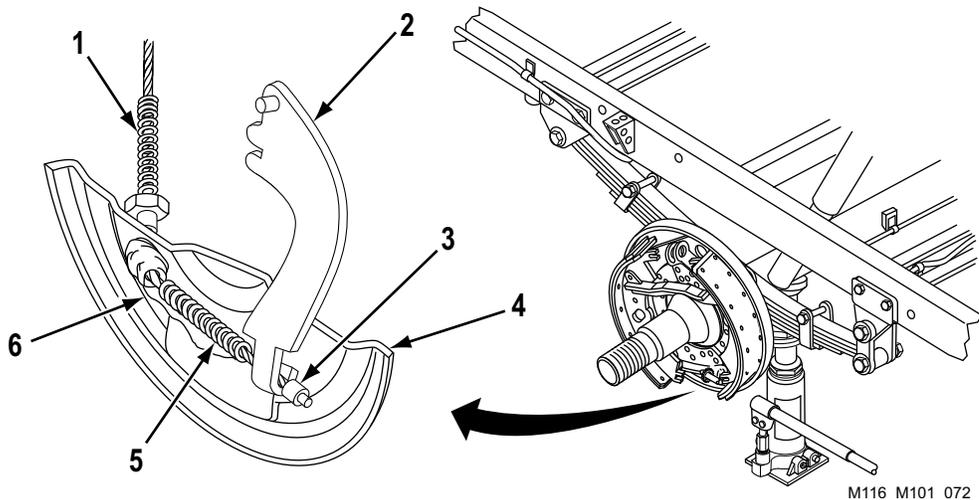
Brake Cable Assembly to Wheel Brake Installation
